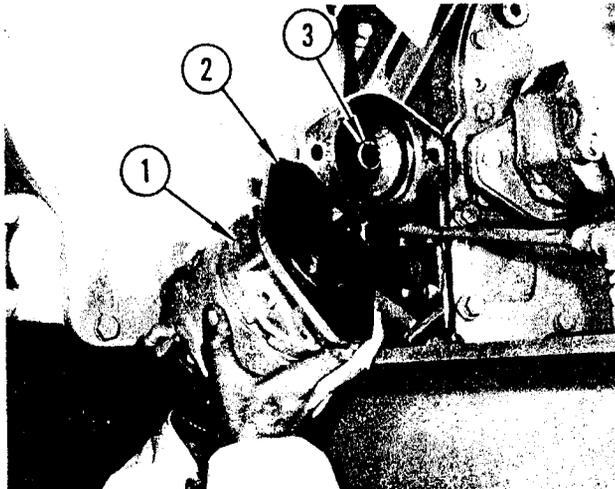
BLADE LIFT HYDRAULIC MOTOR
